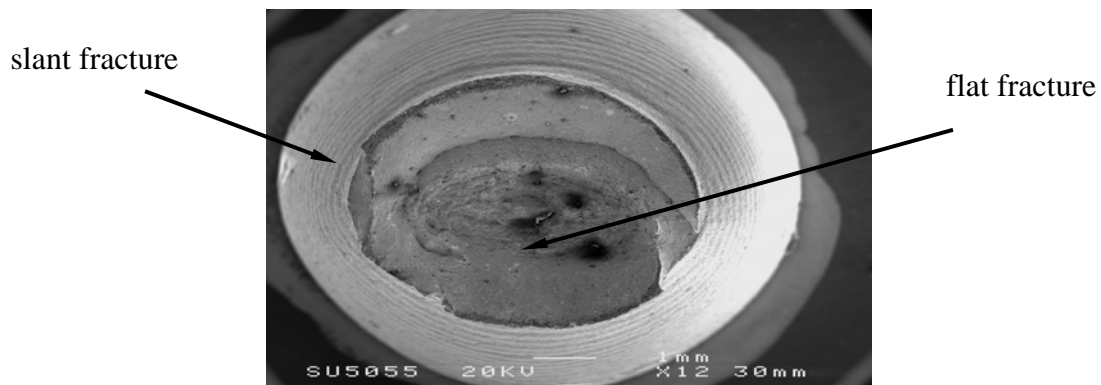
SEM of oval cross section from plain bar tensile specimen
